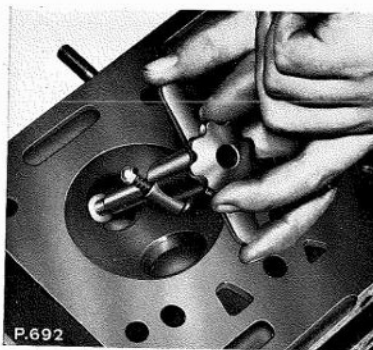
Installing the valve seat grinder pilot in the valve guide, using the hand wrench
